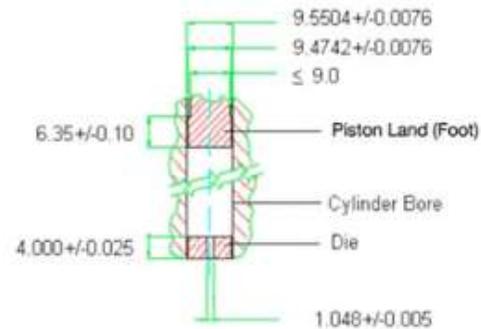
a - Dimensions of the cylinder bore, piston foot & "half" die
